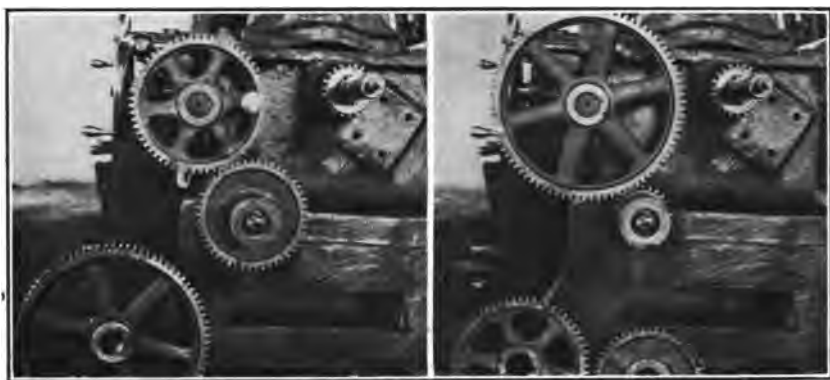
VIEWS SHOWING THE INCREASE MADE IN SIZE OF FEED GEAR ON AXLE LATHE AFTER THE ADOPTION OF HIGH-SPEED TOOLS.
